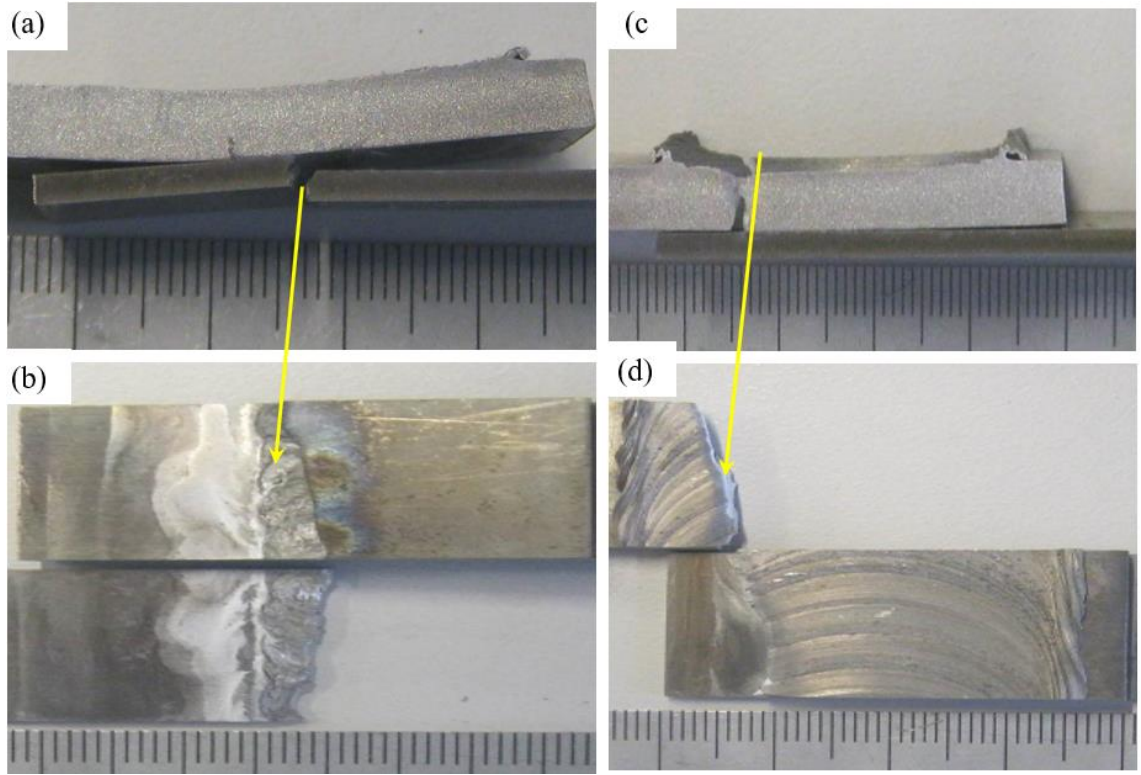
Fatigue fractured surfaces: (a) A side view of TiAl64V fractured weld sample, (b) A top view of TiAl64V fractured weld sample, (c) A side view of AA2024 fractured weld sample, (d) A top view of fractured AA2024 weld sample.
